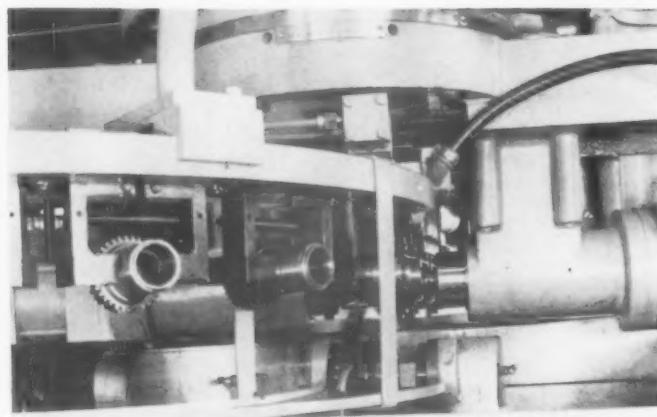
, at right, a highly coordinated system for automatic feeding of gears through one or several machines, by Michigan Tool Company, Detroit. As applied to a Michigan No. 870 gear shaving machine, the gears are loaded into work holders on a conveyor which passes right through the machine.
